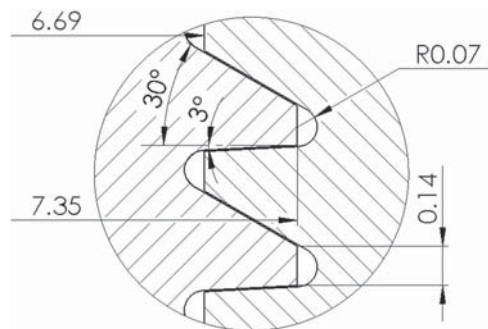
The parameters of the customized buttress thread used in this design (mm).
